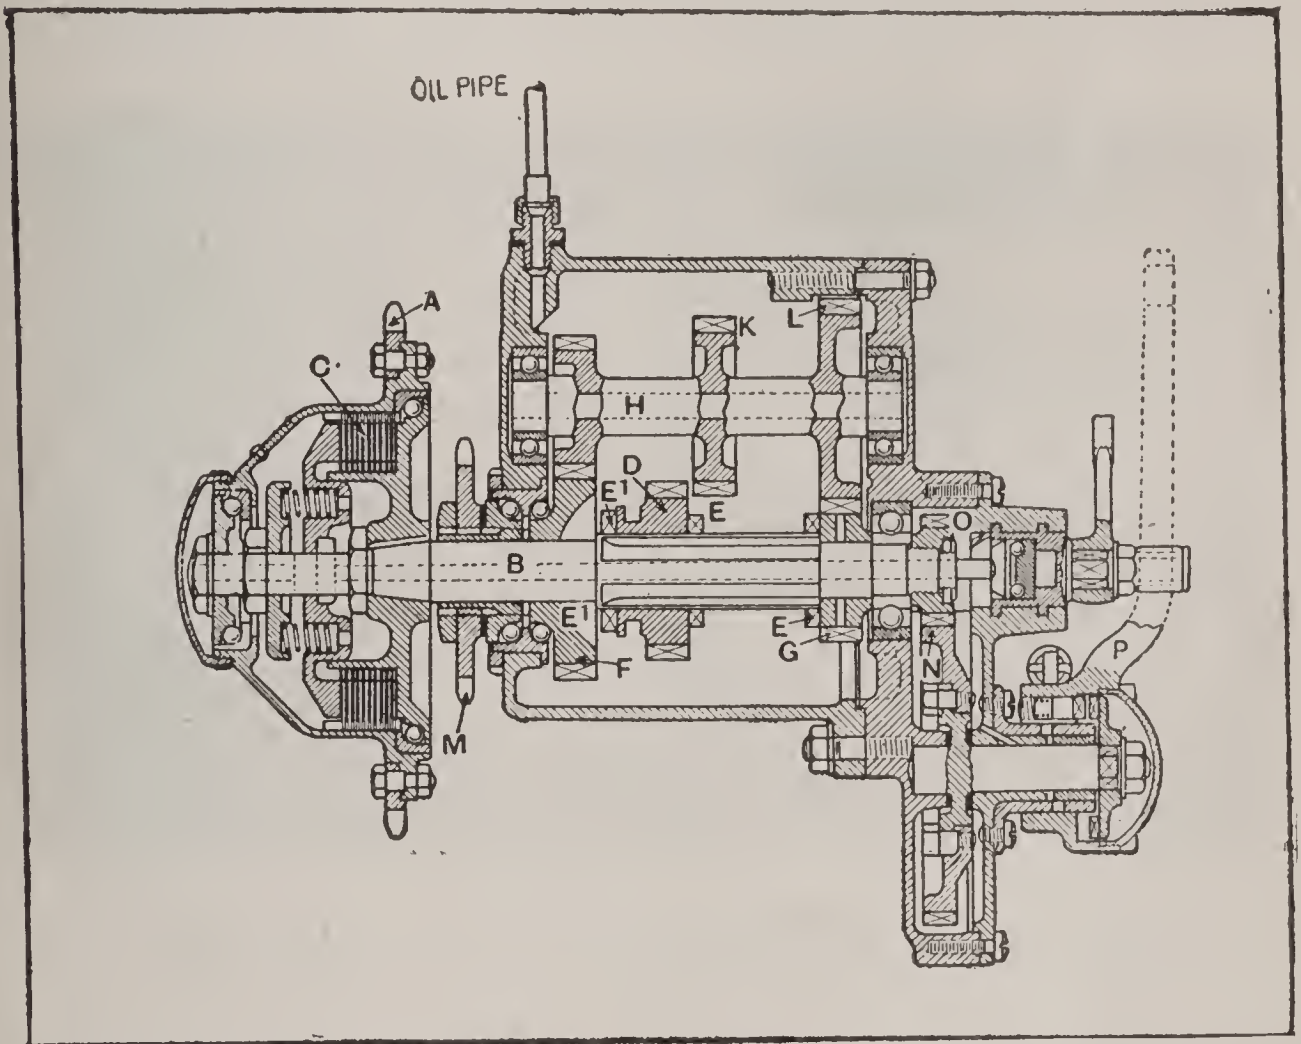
English Three Speed Countershaft Change Speed Gearing of the Sliding Type.
